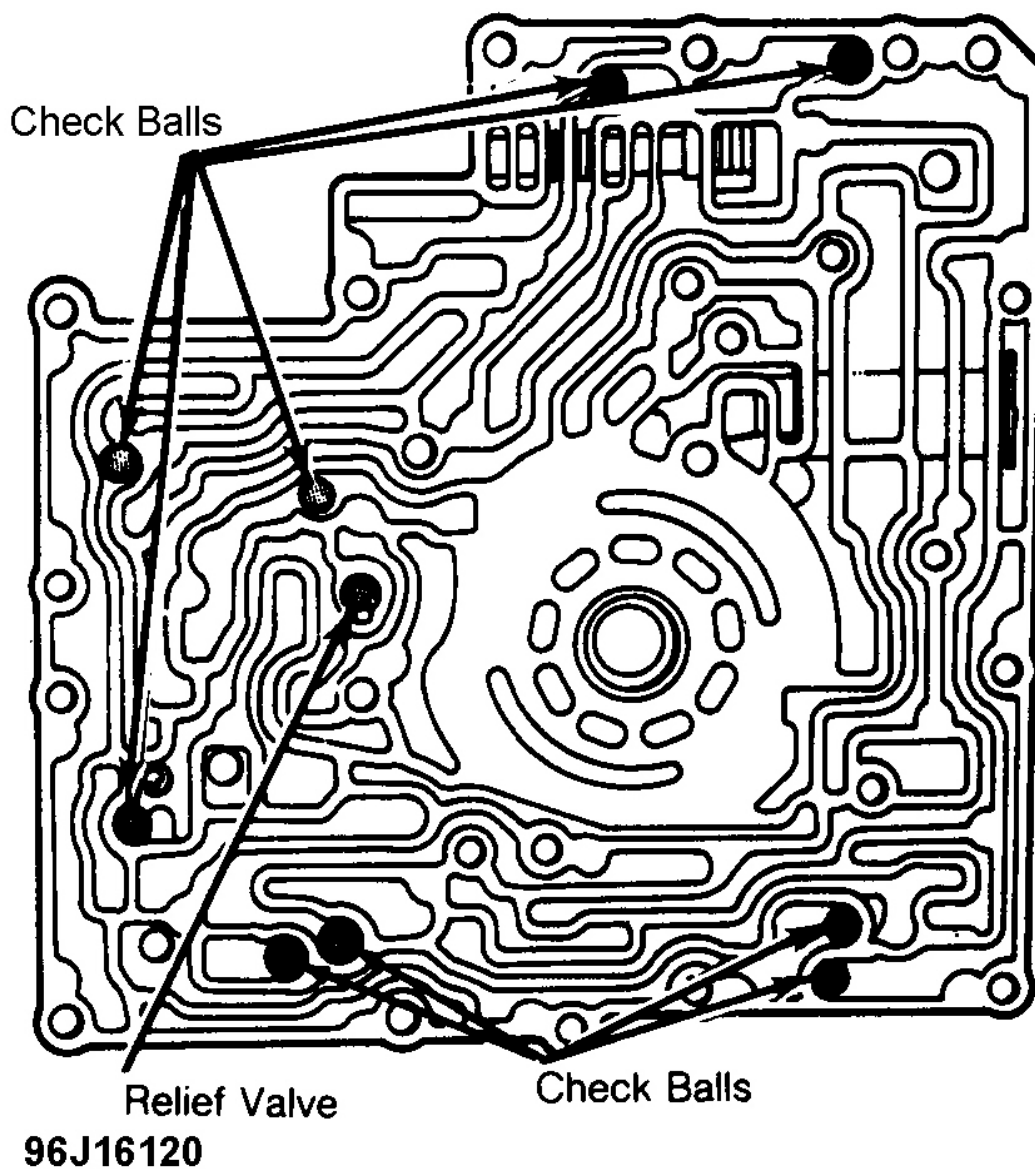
Oil Pump Check Balls & Relief Valve Locations
